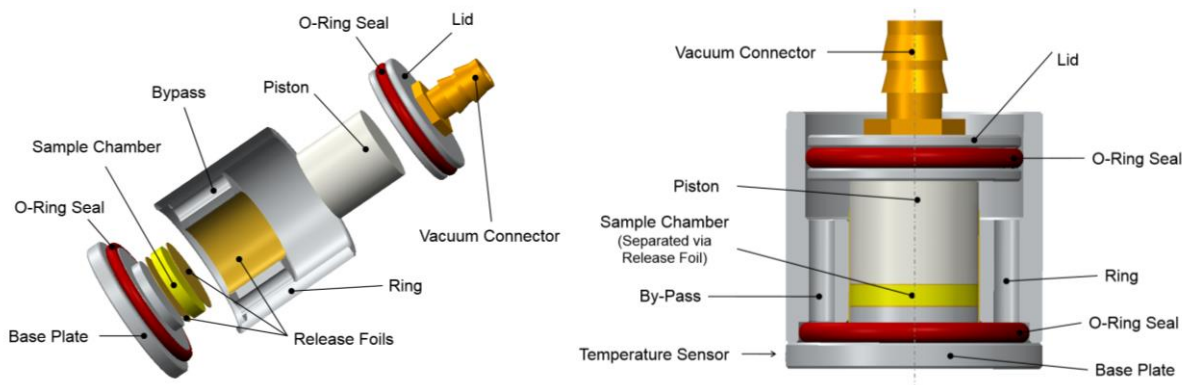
Sectional view of the vacuum compression tool; left: 3d explosion view, right: assembled front view.
